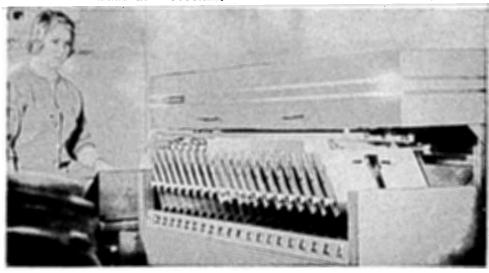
Collecting and gathering machine speeds up considerably completing of brochures.
